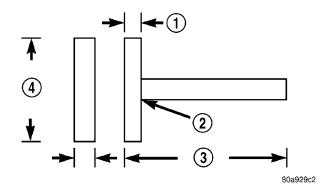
Tool For Cigar Lighter/Power Outlet Removal
